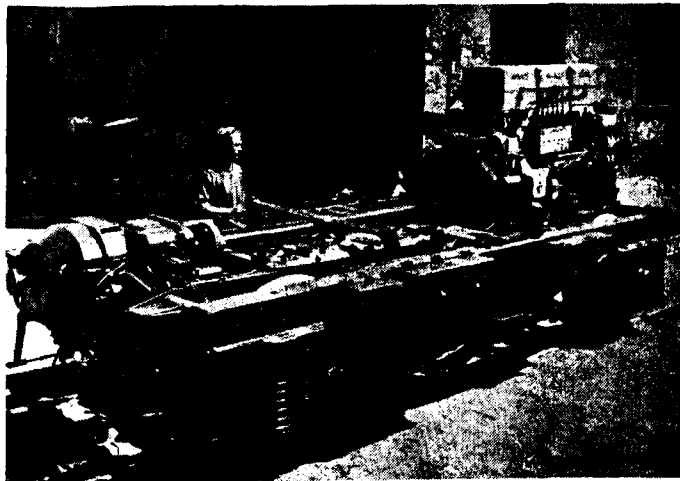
Power bogie of the Ganz railcars containing the main parts of the machinery equipment.
